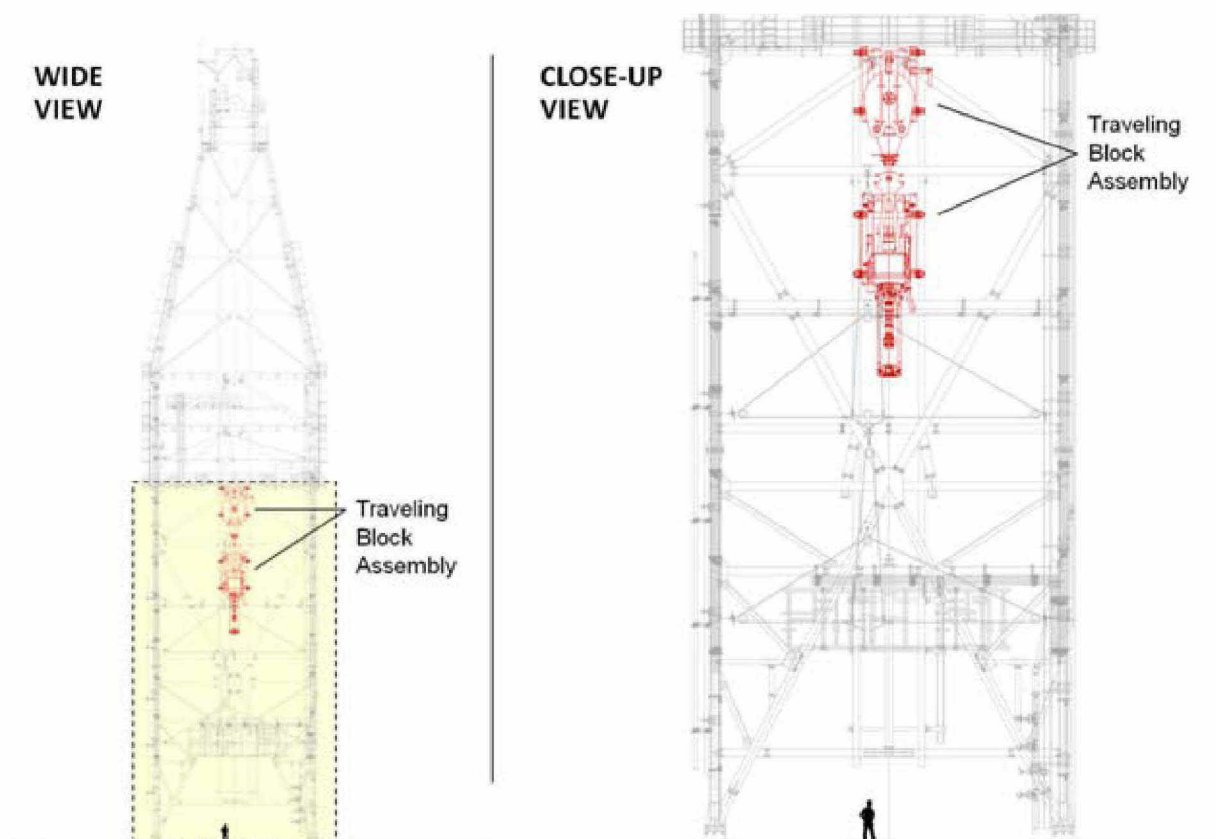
Schematic Drawing of DWH Traveling Block Assembly
